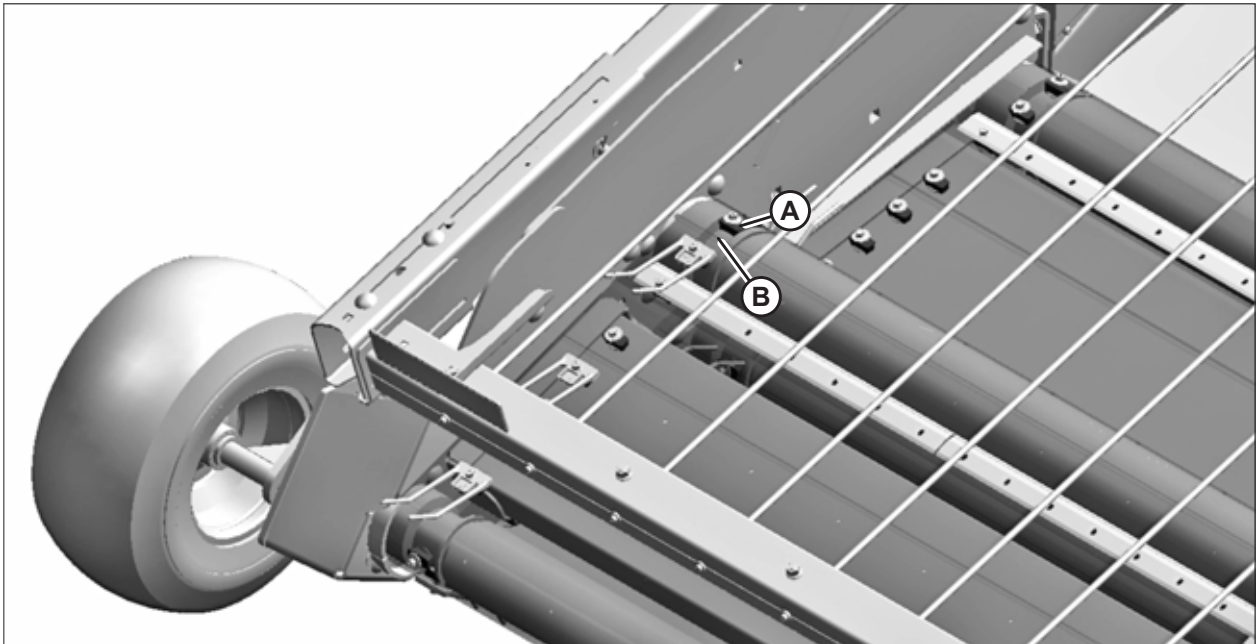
Stepped Position Indicator Gauge – Right Side
